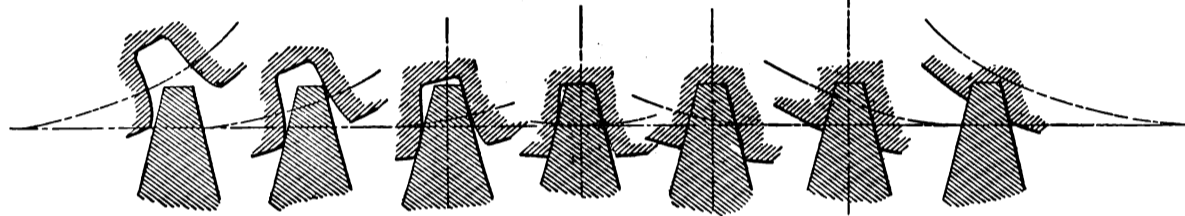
BILGRAM'S BEVEL GEAR CUTTER.
